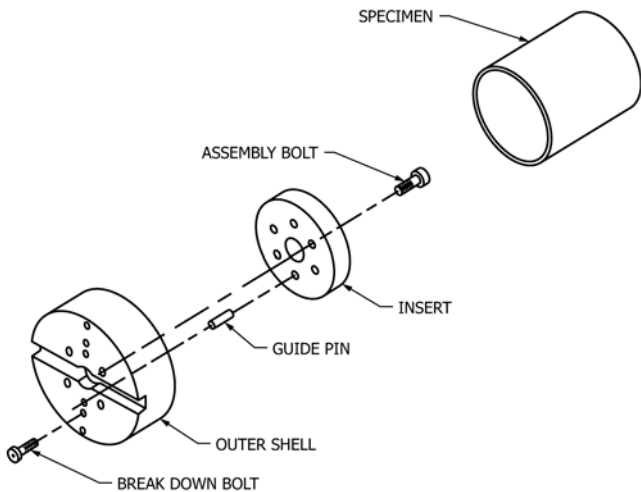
Assembly Drawing for the Compression Fixture and Specimen
